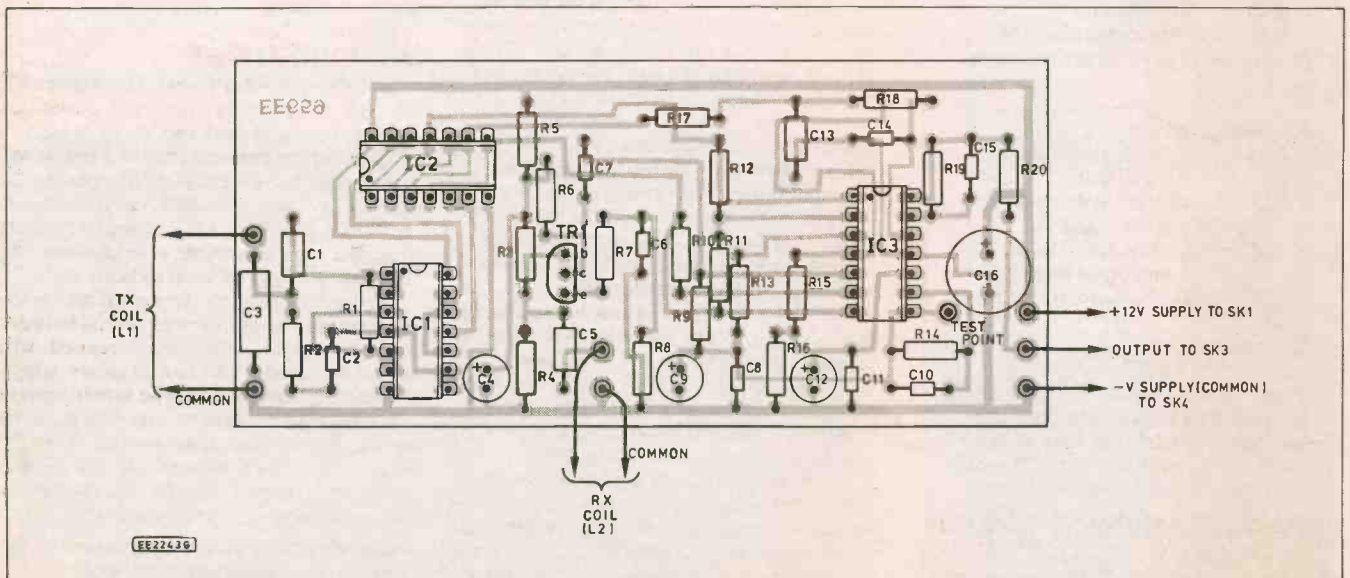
Printed circuit board component layout and full size copper foil master pattern for the detector board. The completed board is shown in the photograph above.
